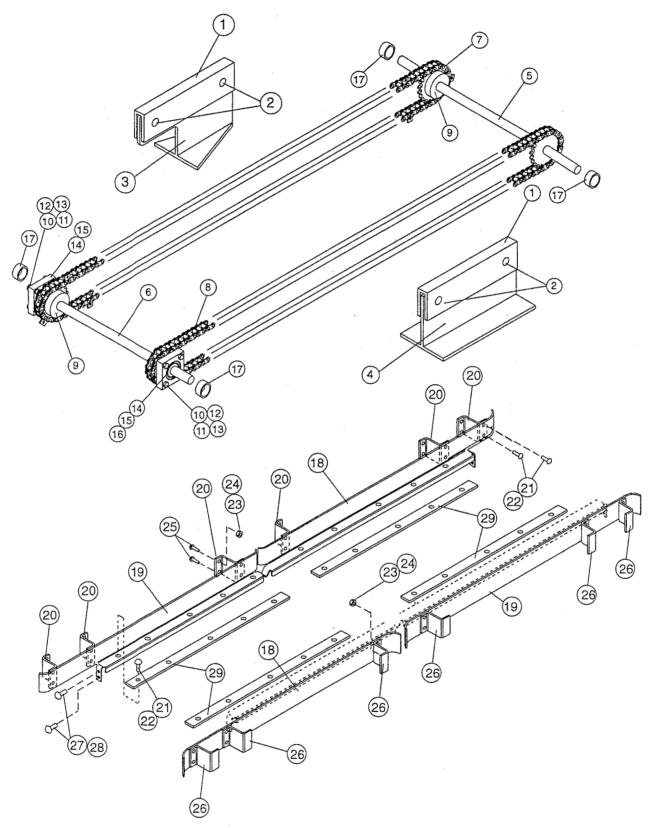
Conveyor shafts, chains, bearings, and guides
